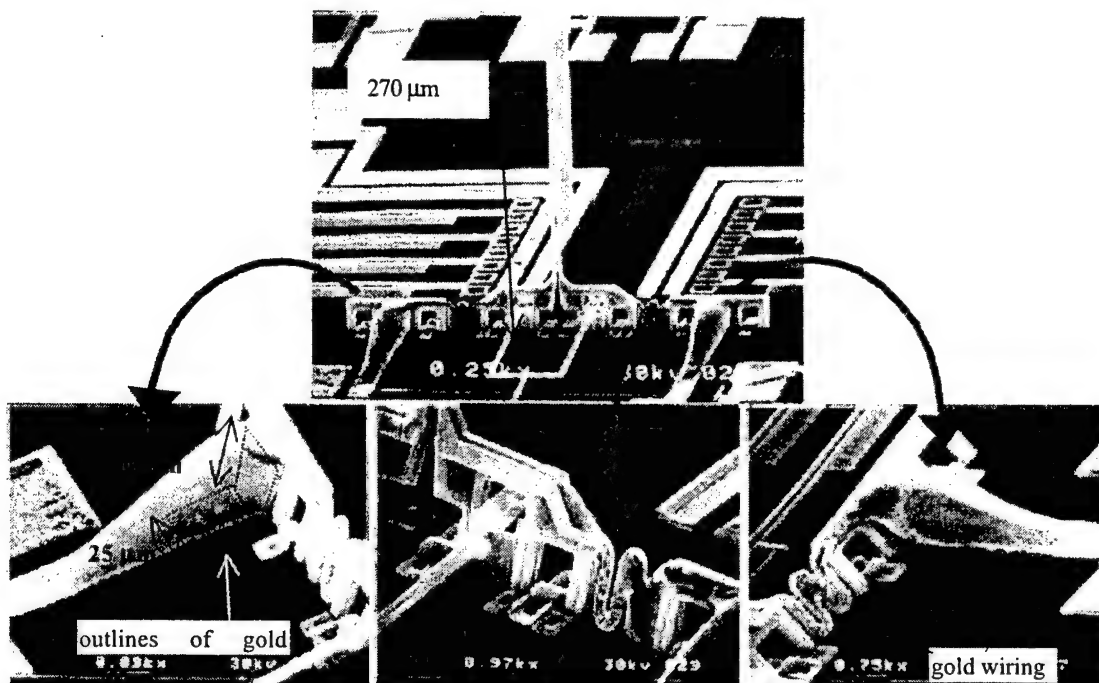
A solder self-assembled two-degree-of-freedom microrobot leg showing close views of the left and right indium solder joints and the electro-mechanical linkage isolating the right solder joint from the leg.
